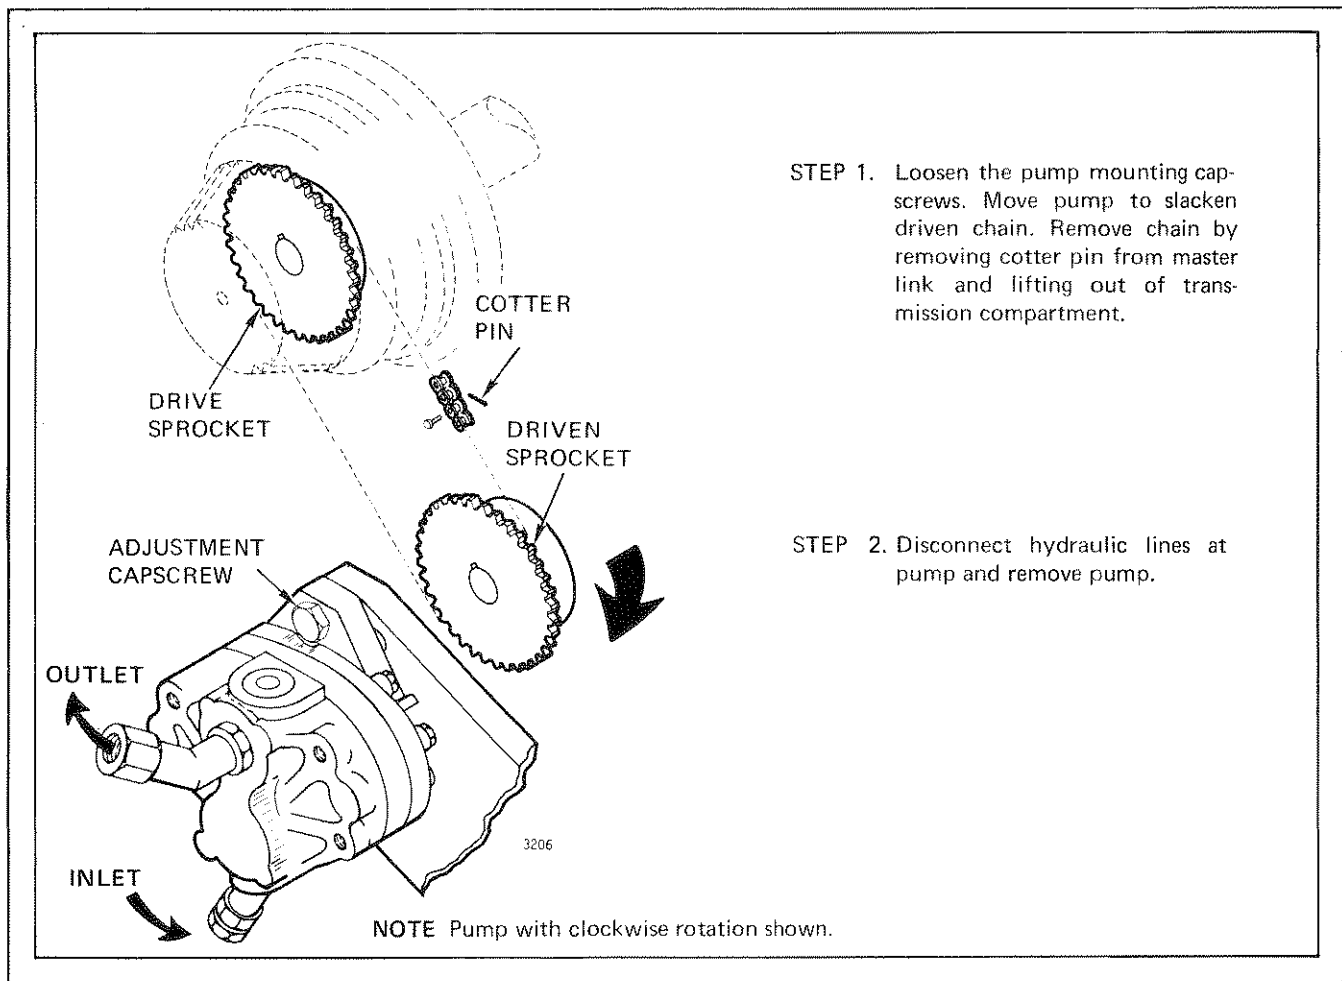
REMOVAL OF HYDRAULIC PUMP
